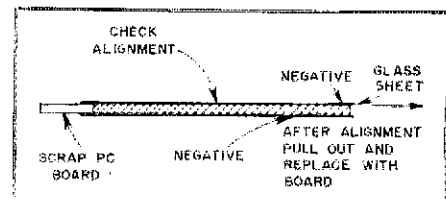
A method of checking negative alignment for double-sided alignment for double-sided circuit boards.
